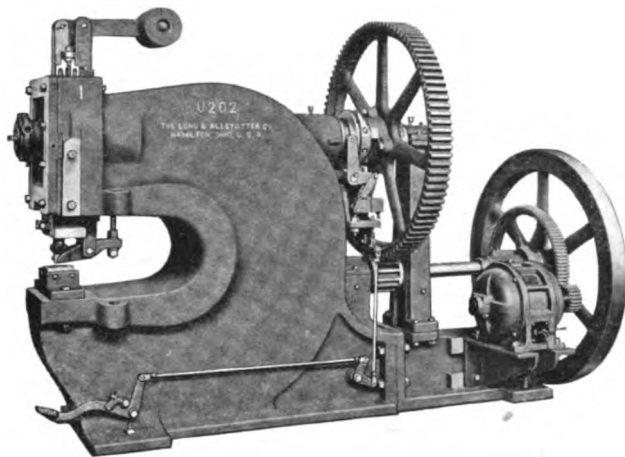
No. 1 Single Machine, 24-Inch Throat
